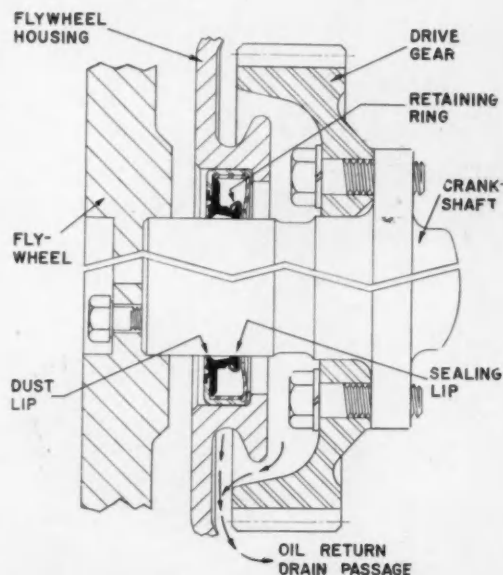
Cross-section of rear crankshaft oil seal installed in flywheel housing. Double lip is basically a silicone rubber sealing element. Life expectancy is 5000 hr.
